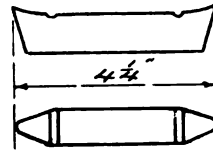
DOUBLE-ENDED TOOL, USED WHEN FINISHING BETWEEN THE CRANK WEBS.
